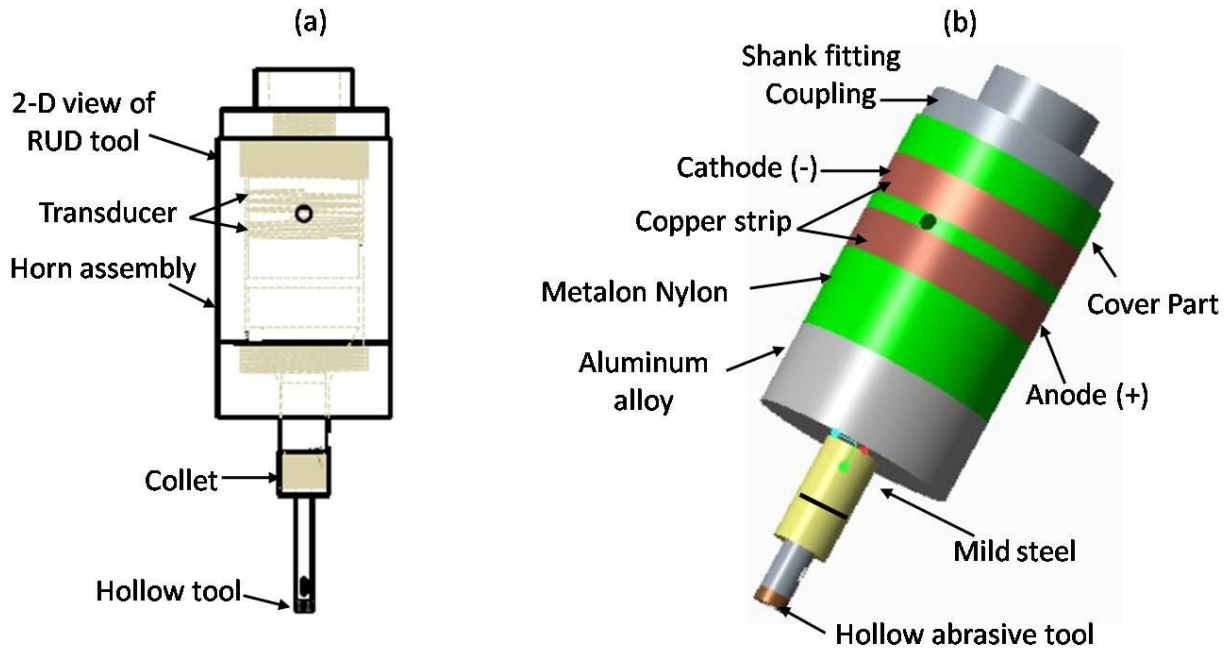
Illustration of experimental set up (a) 2-D view of RUM tool and float glass specimen, (b) 3-D view of RUM tool assembly
